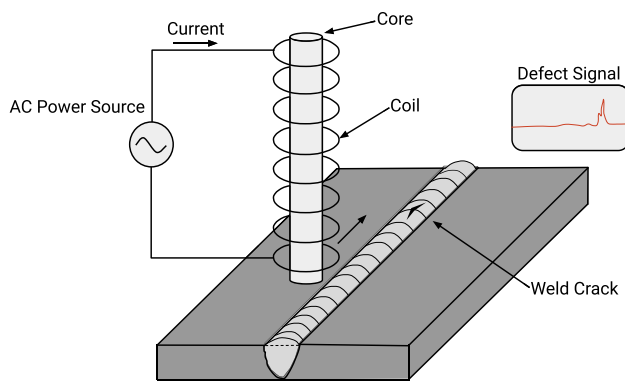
Analysis of defective weld bead using eddy current testing
